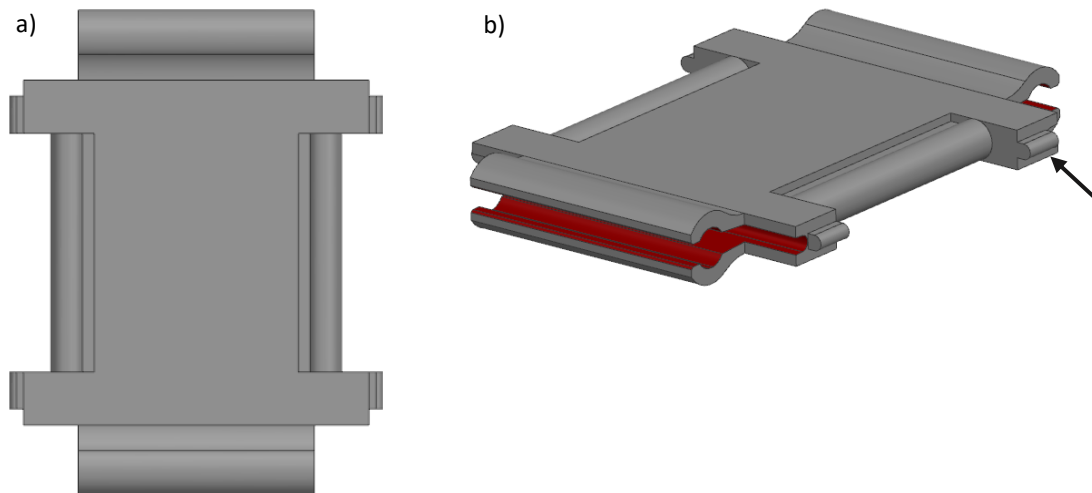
a) Polymer host part top view, b) Polymer host part perspective view
